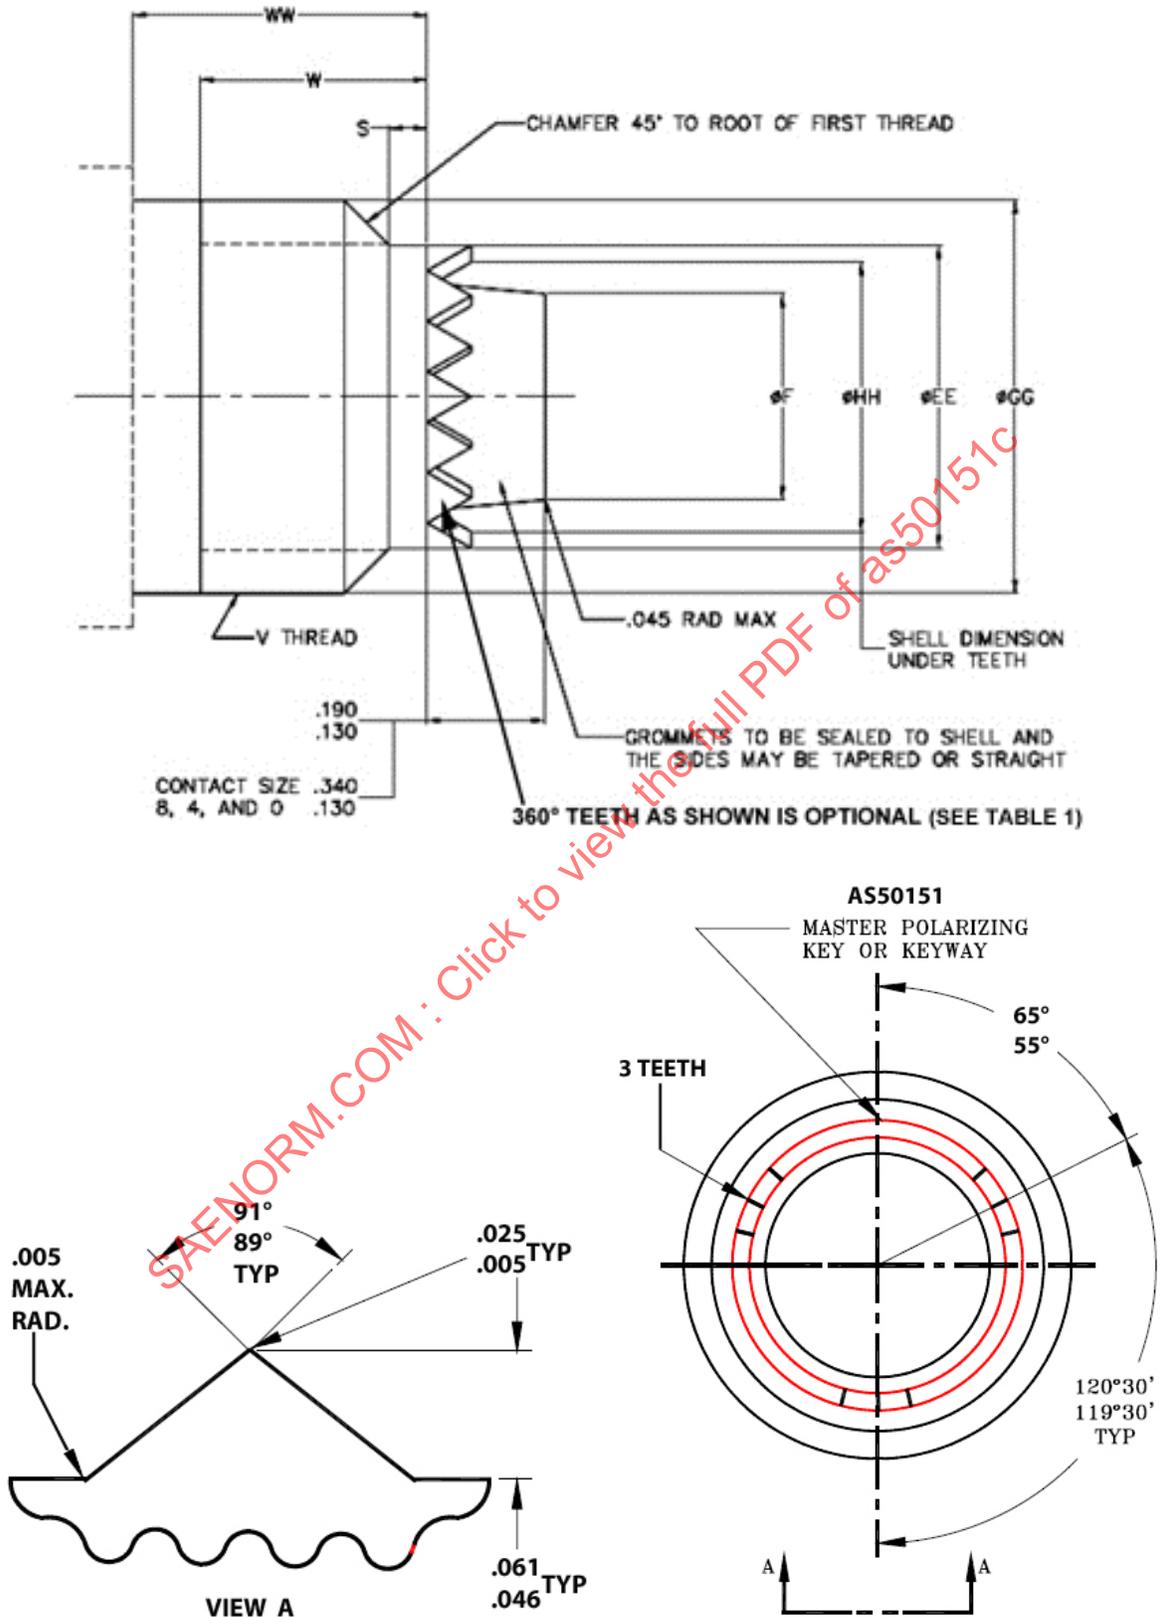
Crimp contact connector back end configuration except AS34021, AS34121, and AS34521
